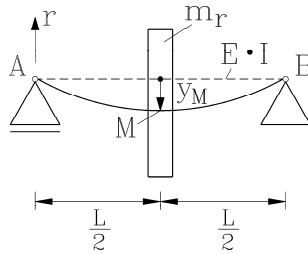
Disc rotor on elastic shaft (Laval rotor)
